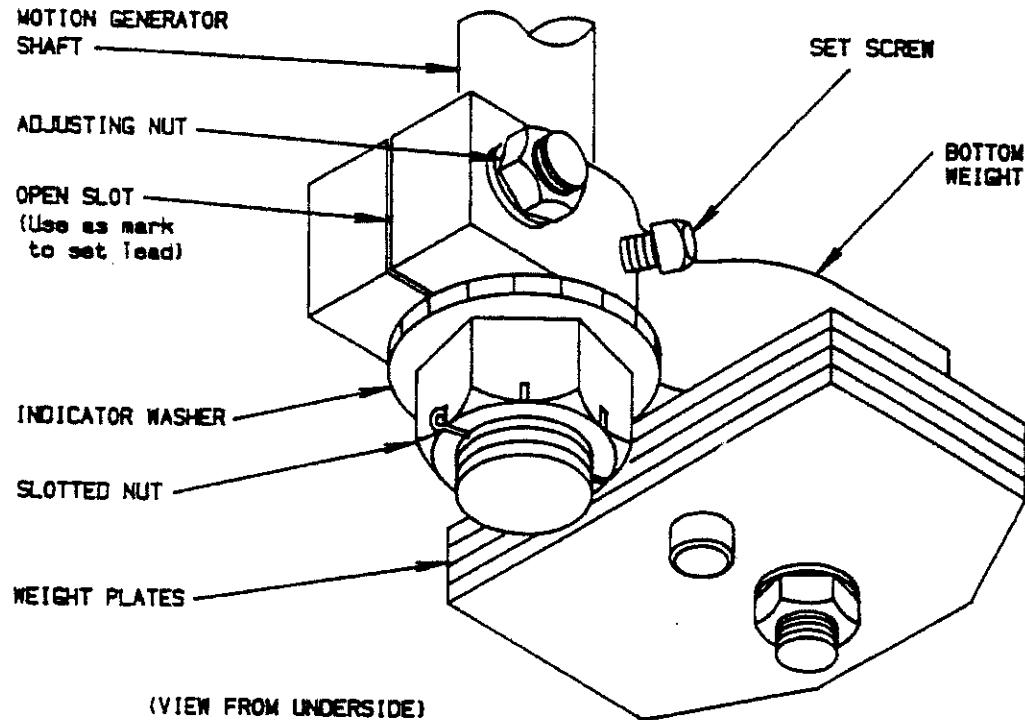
BOTTOM WEIGHT ASSEMBLY
